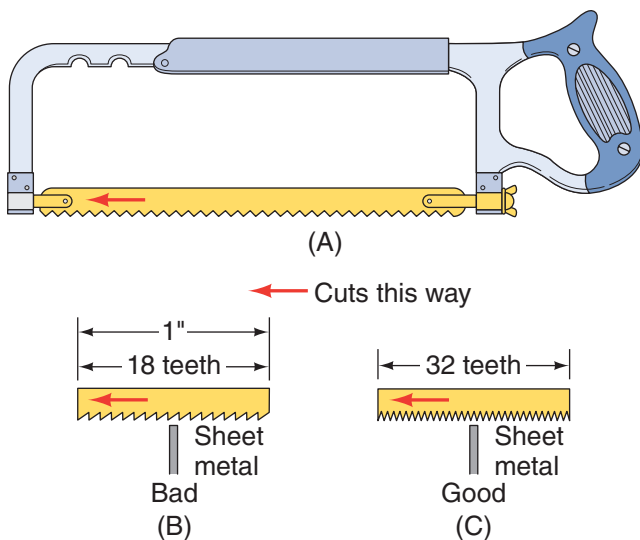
(A) The teeth on the blade in a hacksaw should face forward. (B) A coarse blade should not be used with sheet metal. (C) A fine blade will work well with sheet metal.
